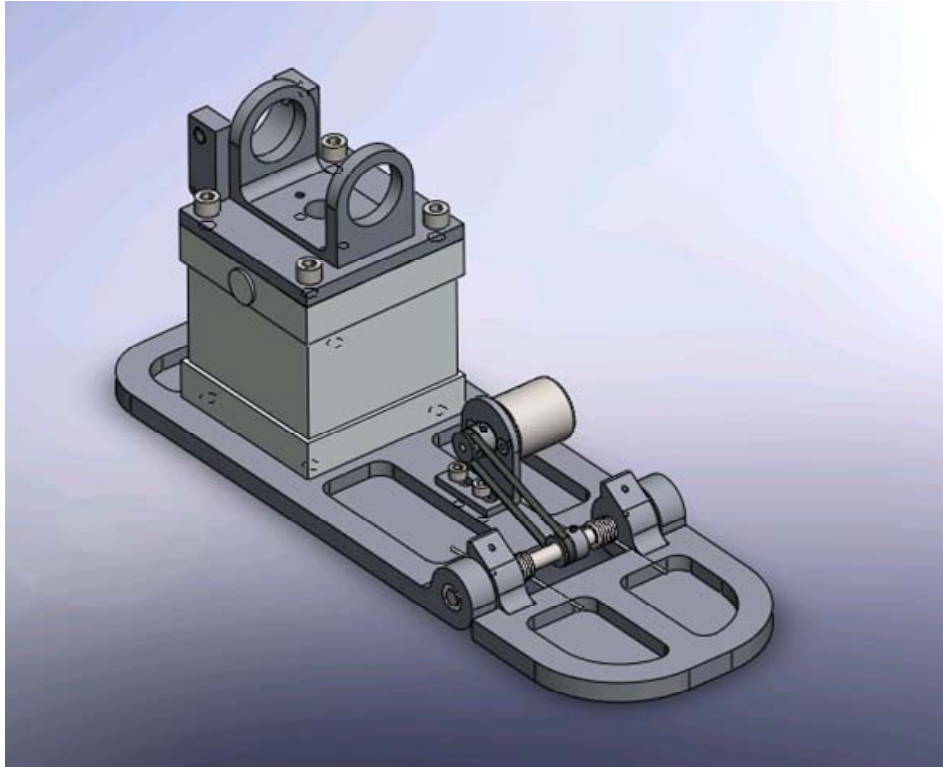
Initial design of foot using 3-axis force/torque sensor and single plate
